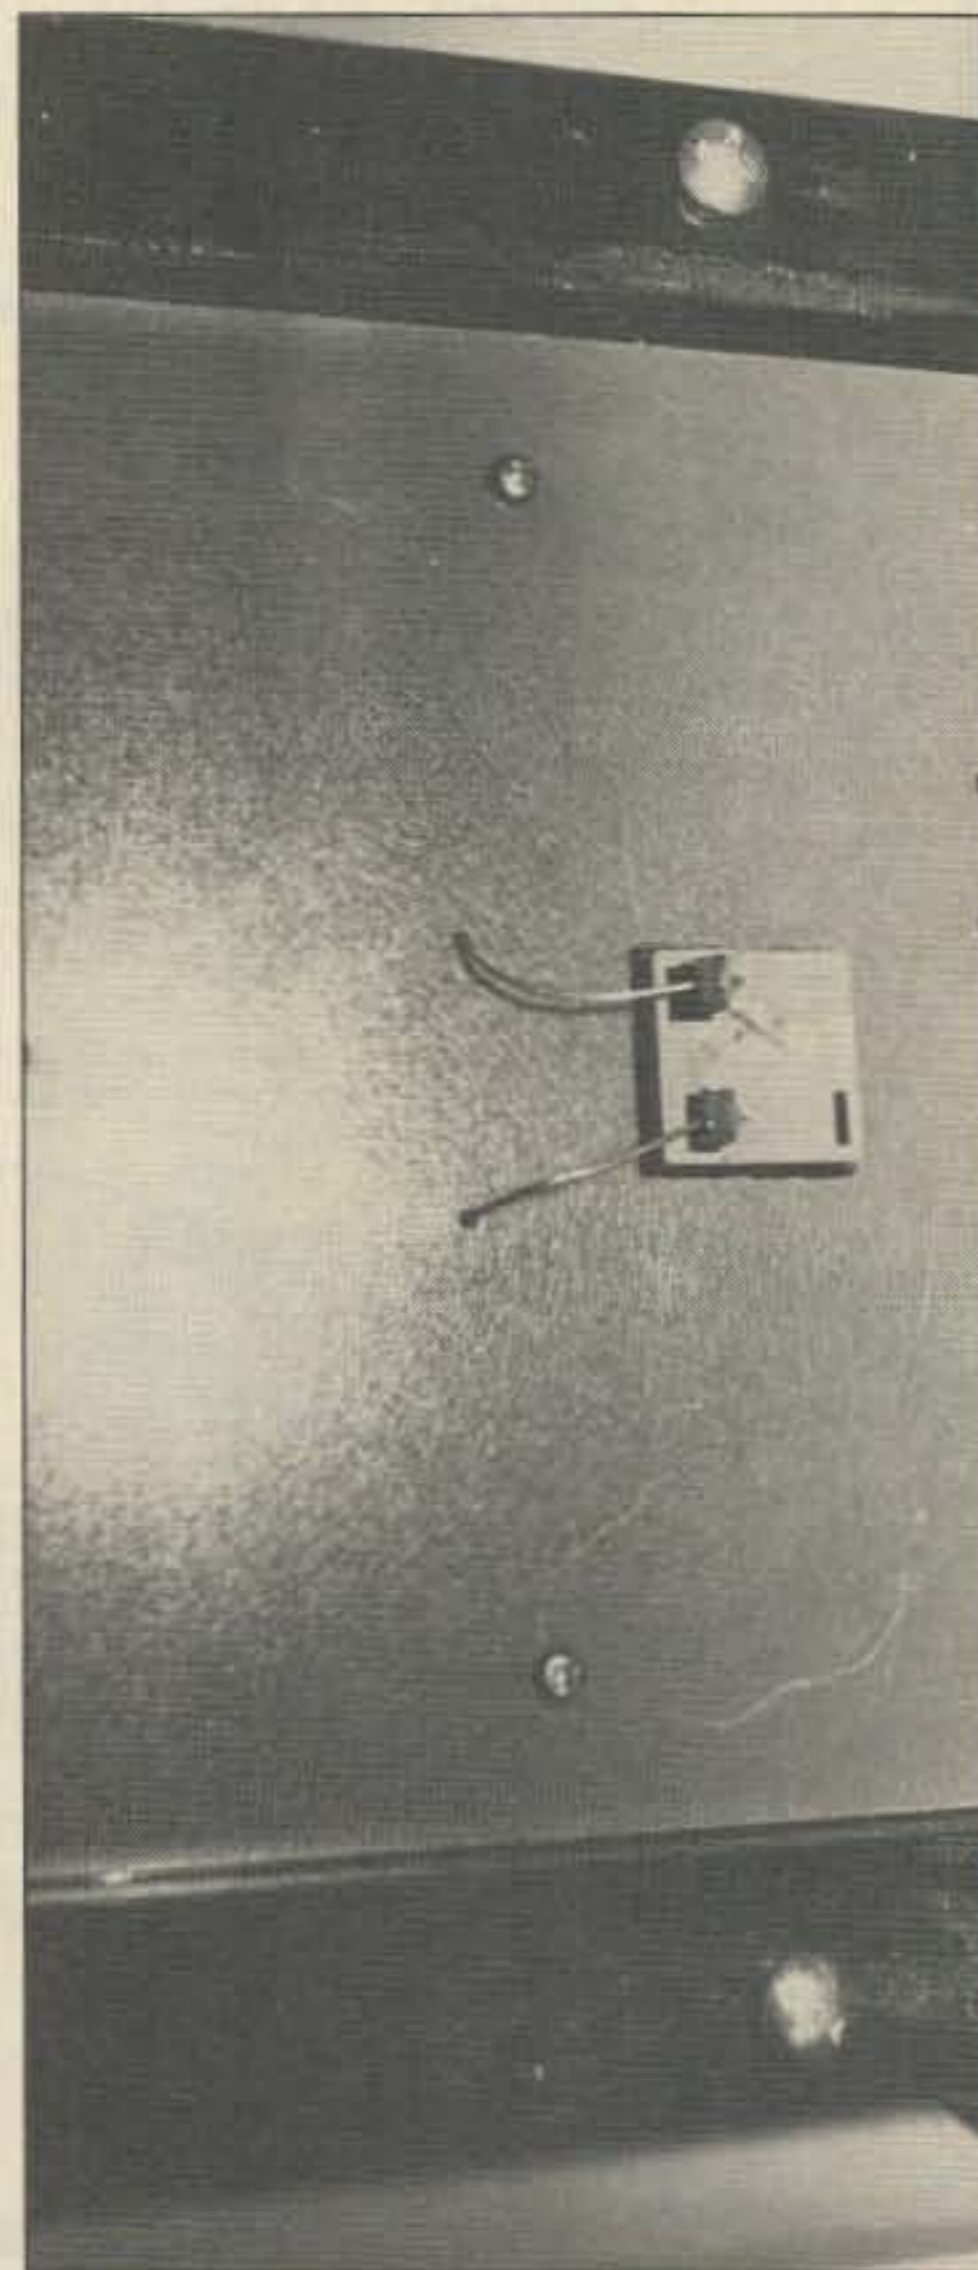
Photo B. These two wires must be unsoldered before disassembly of the keyboard PCB and resoldered when putting it back together.
